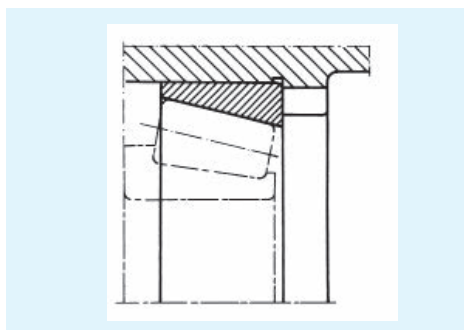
Tapered roller bearing abutment with grooves for puller placement
